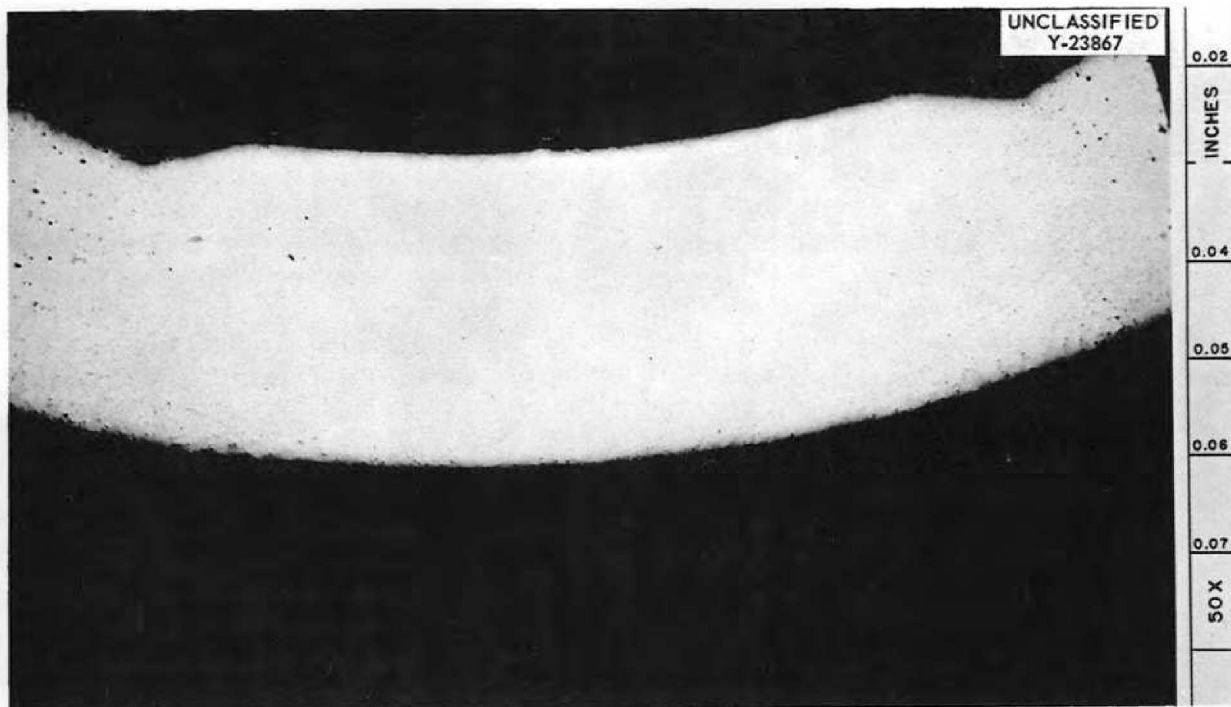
Weld drawn Hastelloy B Tubing Showing the Results of Excessive Penetration of the Weld Bead. Unetched. 50X.
